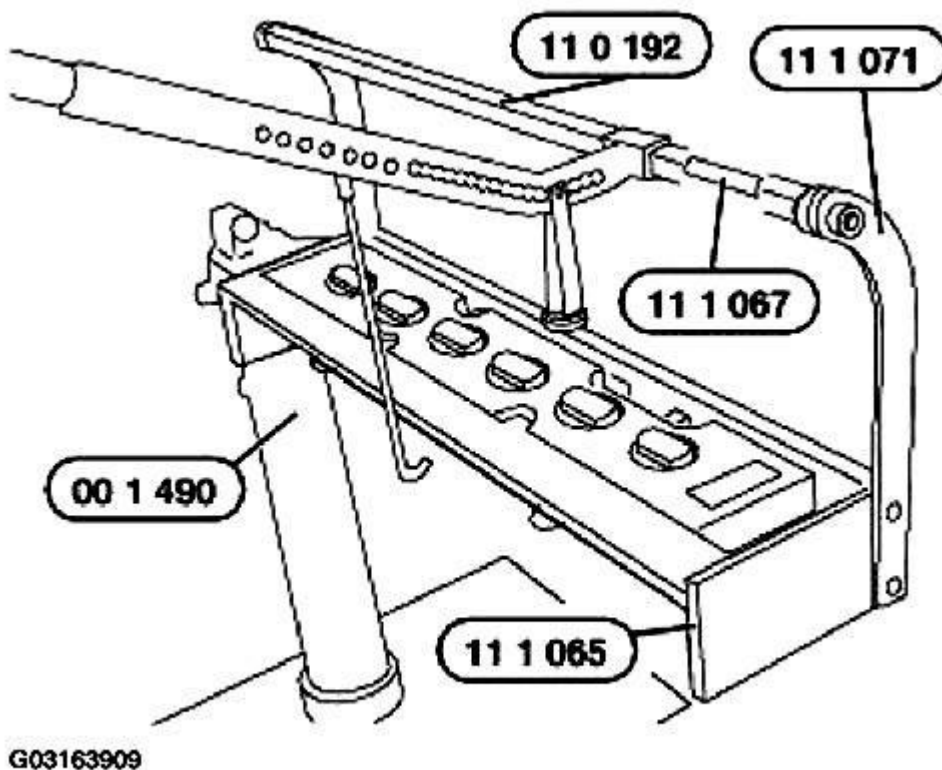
Identifying Special Tools 11 1 071, 11 1 067 And 11 0 192
